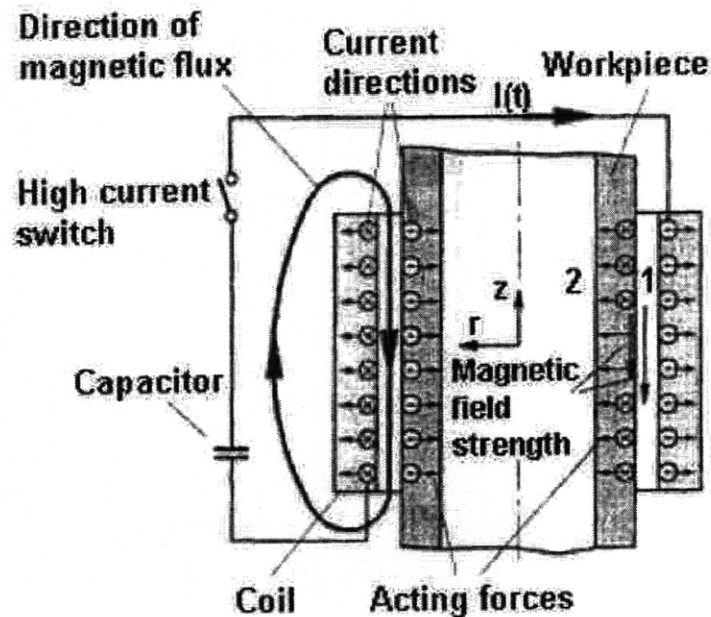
Cross-section of a graphic depicting the coil and the outer workpiece (the inner workpiece is not depicted in this case), as well as the circuit, the magnetic flux, the direction of the currents and the acting forces [4].
